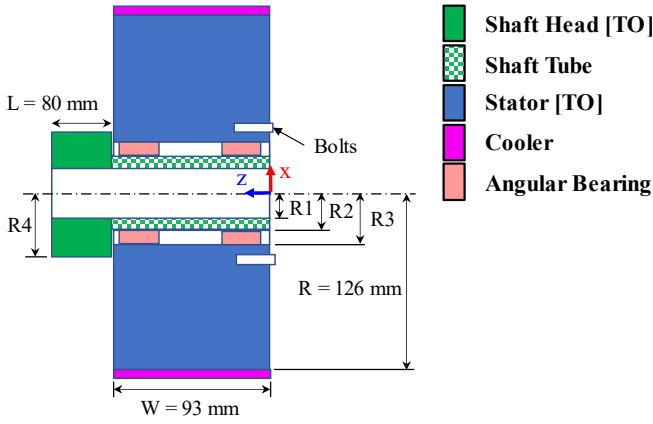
Cross-sectional diagram of motor assembly, showing the design variables and some outer dimensions.
